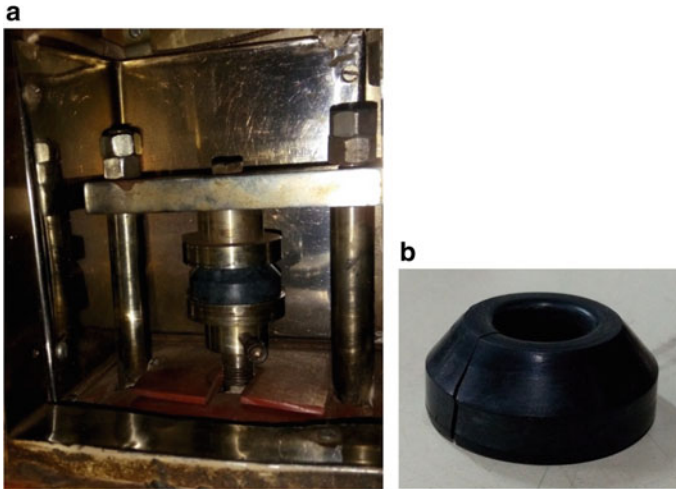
a Fatigue test rig. b Failure of rubber spring
